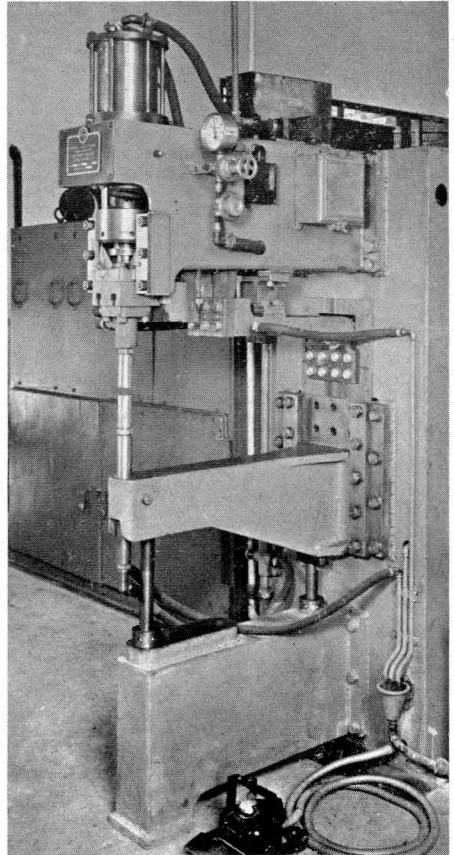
A modern example of a pneumatically operated spot welder.
